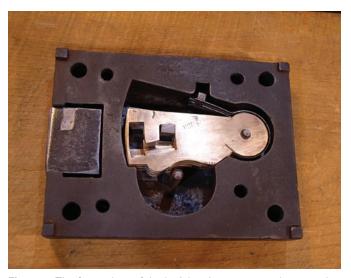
The front plate of the lock has been removed to reveal the casting surrounding the stack of levers on top of the bolt.
